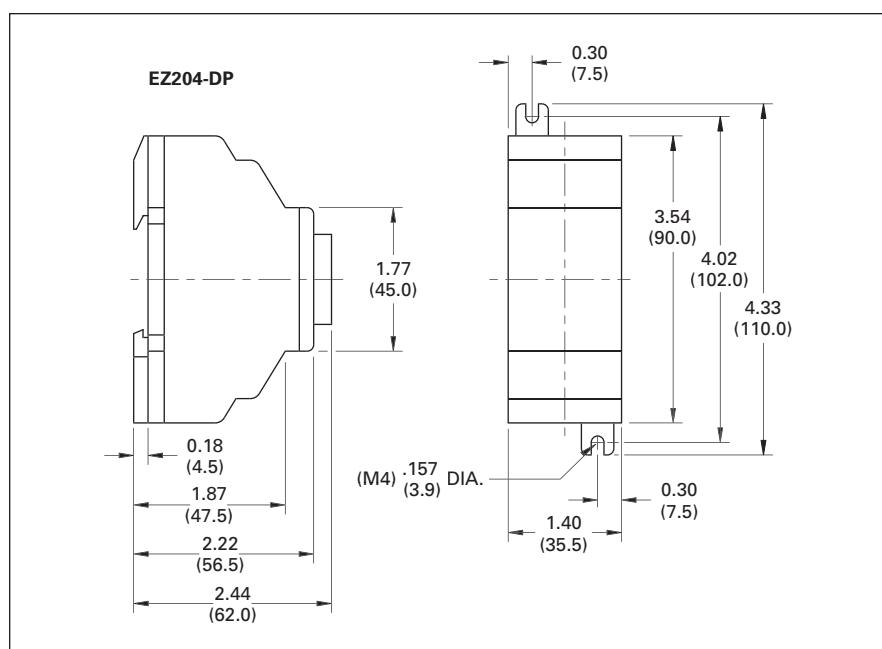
EZ204-DP Series Dimensions in Inches (mm), Drawing Number MD05013011E
